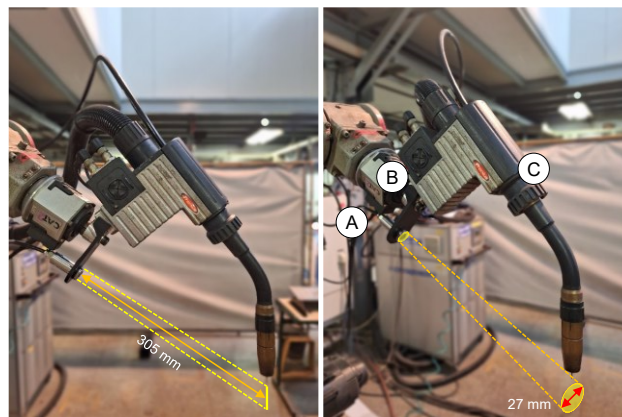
Result of the holder fabrication and temperature sensor assembly.
